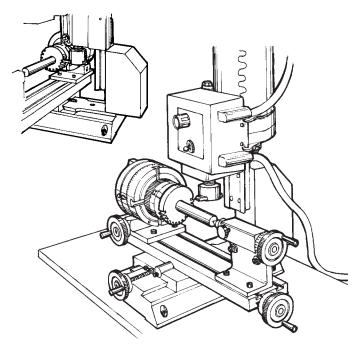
A sample setup for cutting a large gear showing the Adjustable Right Angle Tailstock in place.
